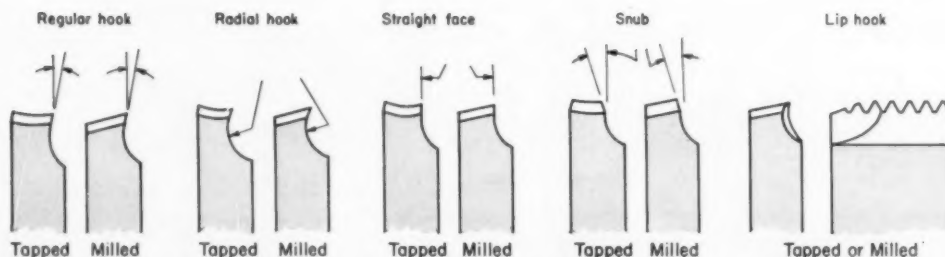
Chaser face grinds. Lip hook grinds include first full tooth beyond chamfer.
